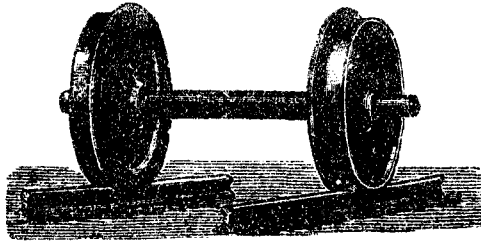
Set of Wheels, with one flange, fixed on  $\bigcirc$  axle, turned for outside bearings.
